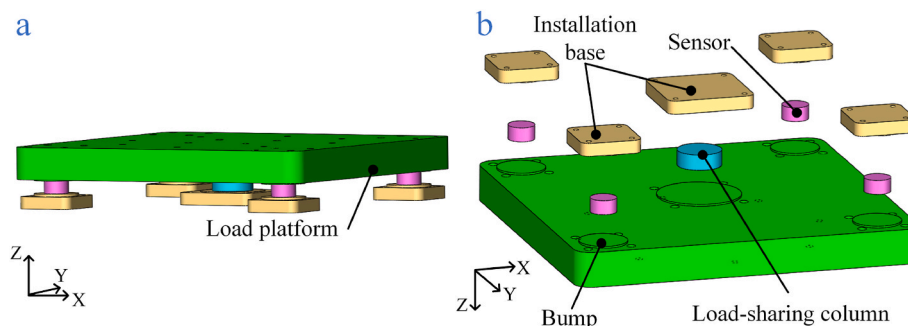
Basic structure of the load-sharing-based measuring platform: (a) front view; (b) exploded bottom view.
